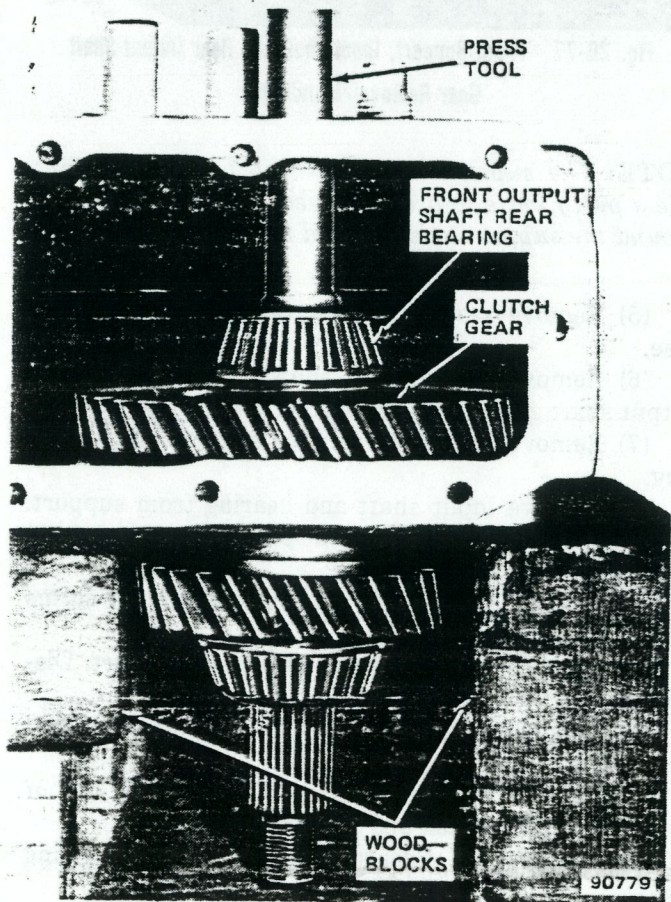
D-81 Front Output Shaft Rear Bearing Removal
